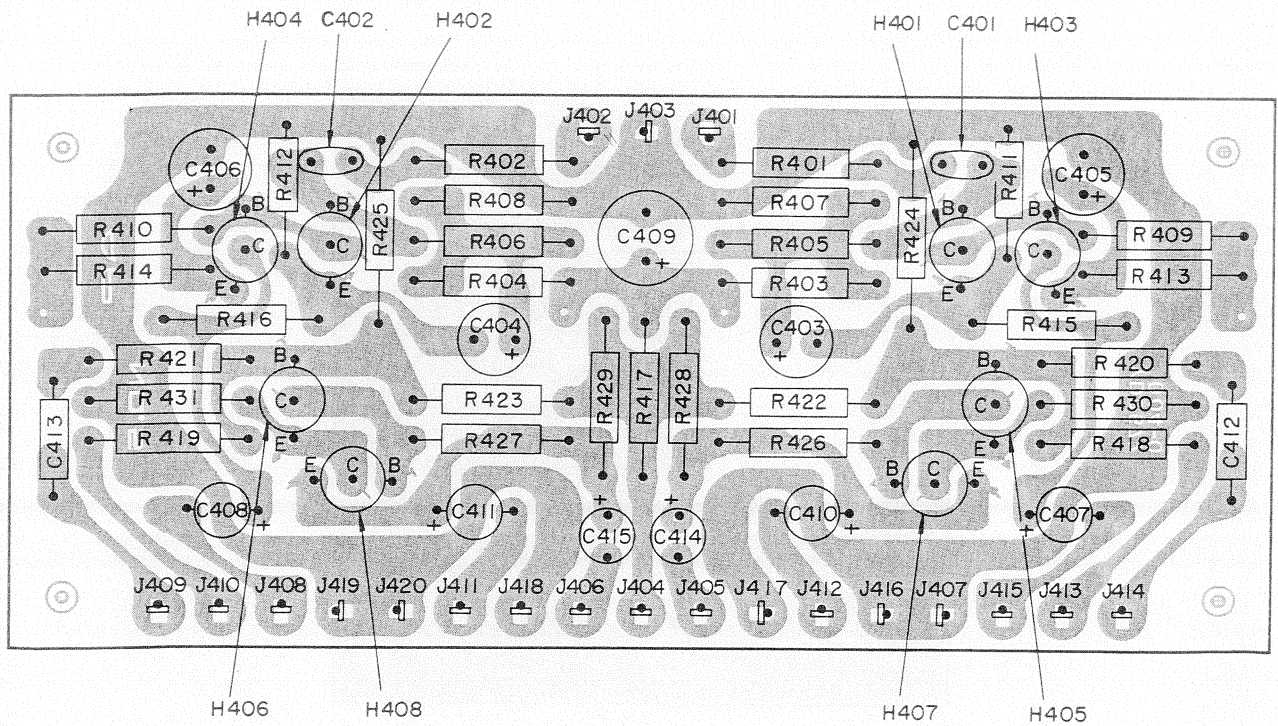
Tone and Pre Amplifier Assembly P400 Component Locations
